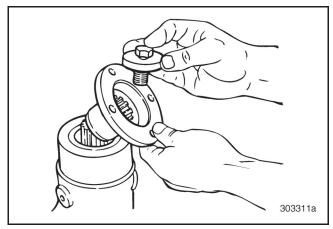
Removing Output Flange, Clamp Plate and Capscrew
